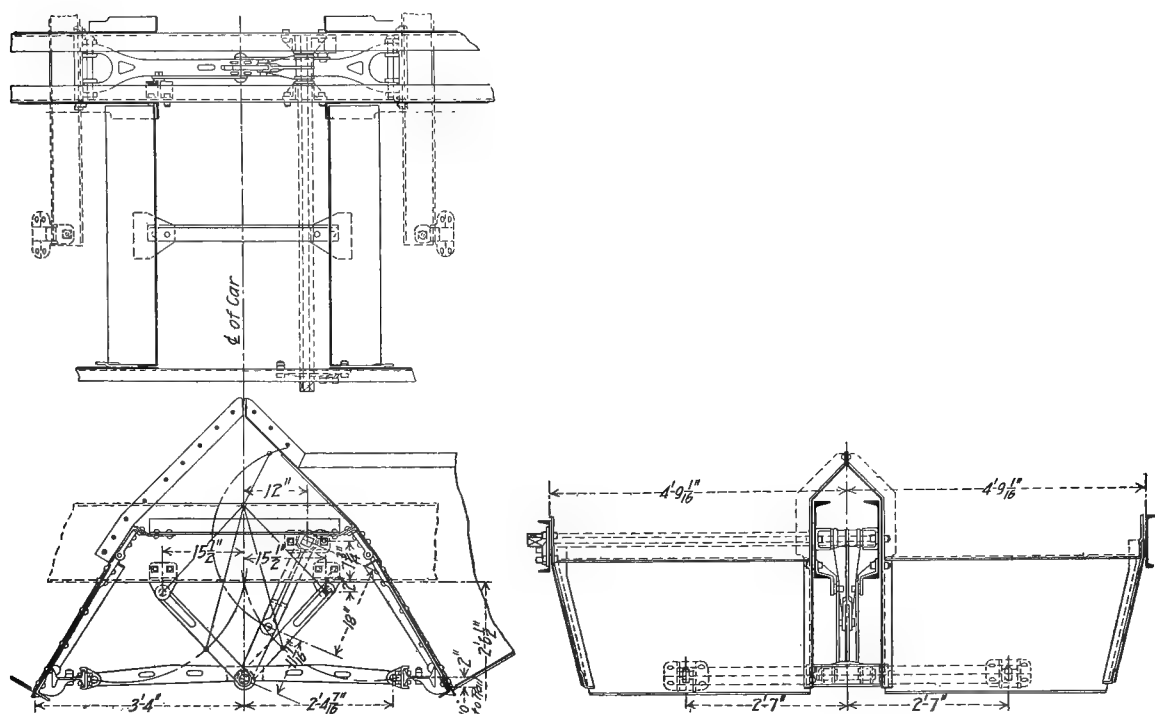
Hopper Door Operating Apparatus. Standard Steel Car Company.
